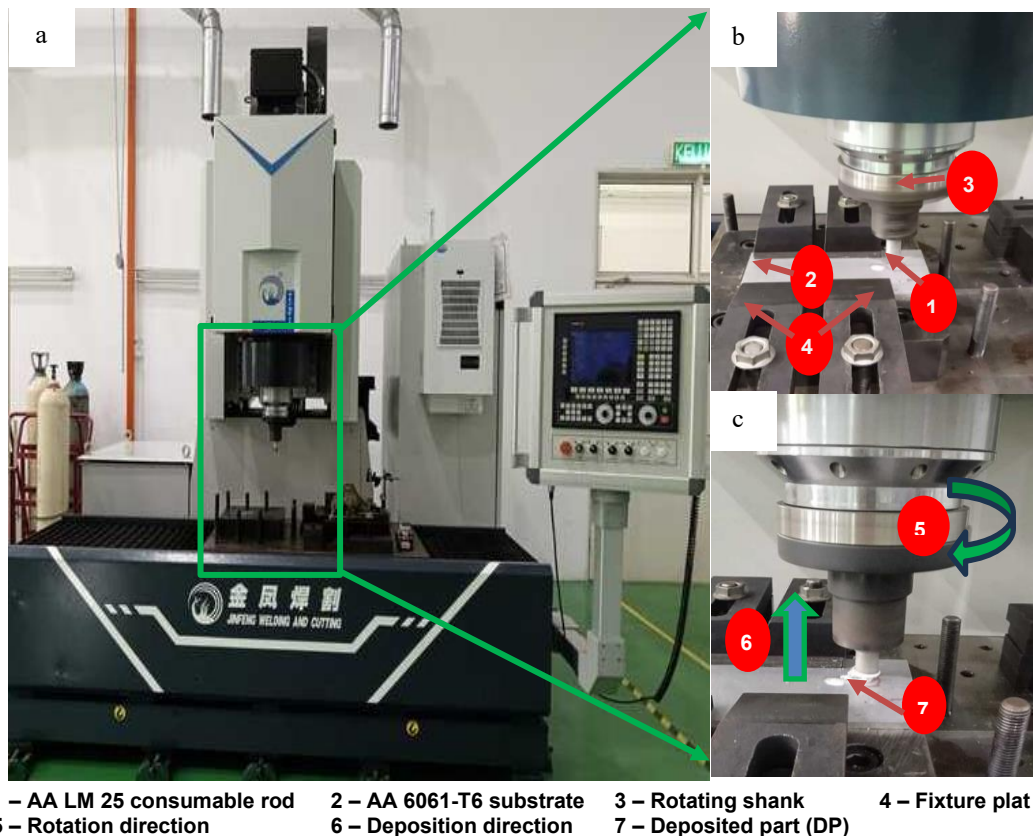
AFSD conducted (a) A CNC FSW machine in UTEm laboratory; (b) setup of the AFSD process of the AA LM25 rod on the AA6061-T6 plate; (c) onset of deposition process
